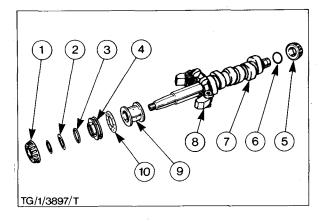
Camshaft and Governor Assembly (Dorset)
